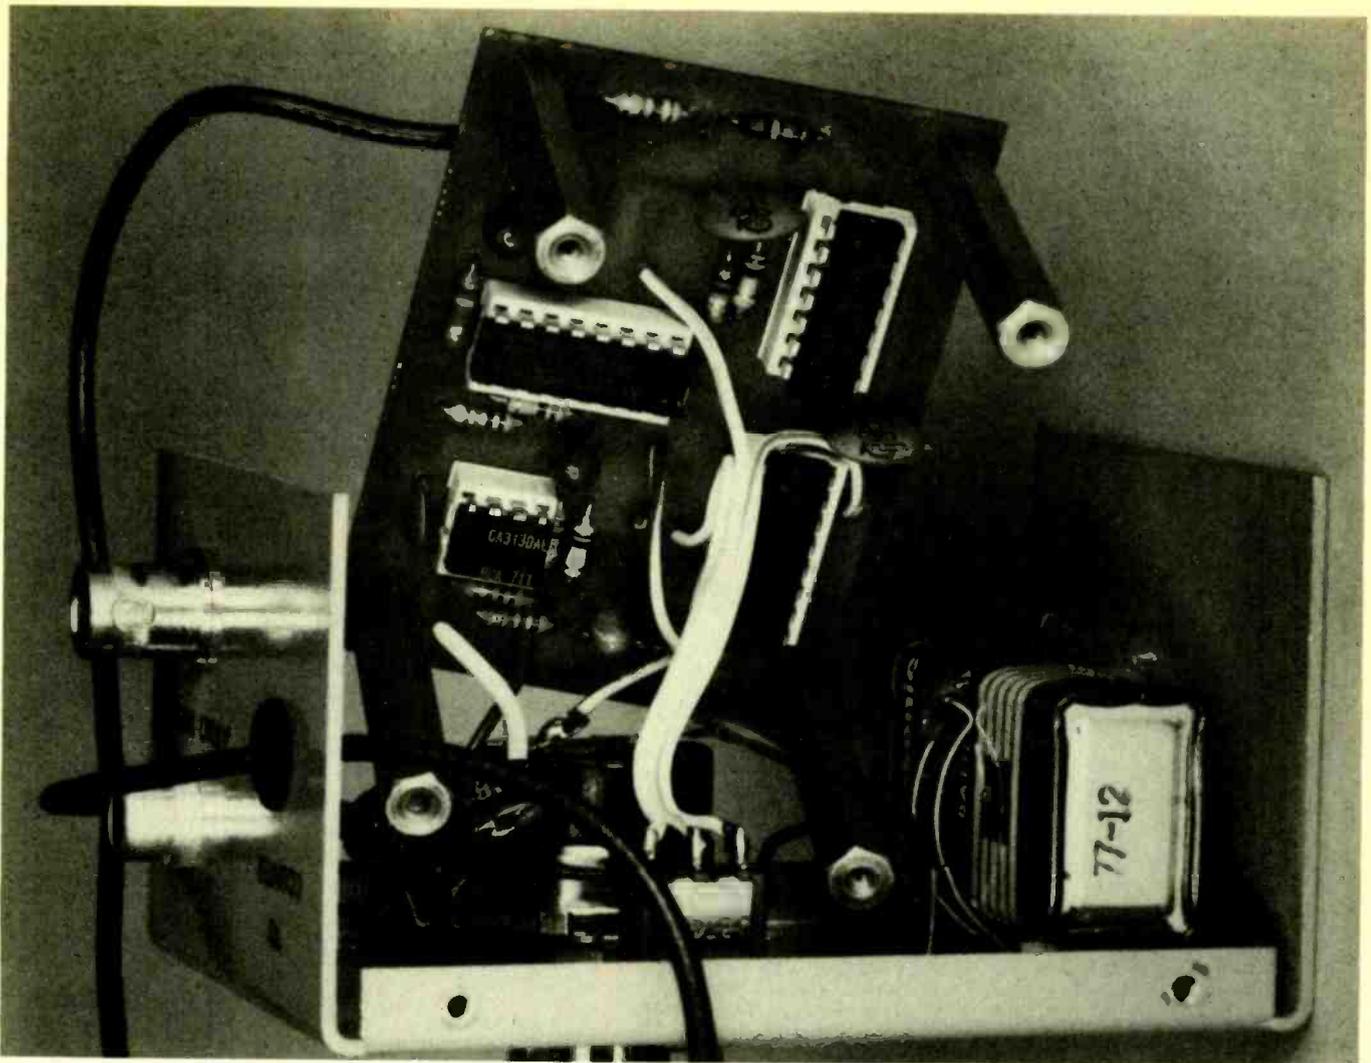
1½-INCH threaded spacers are used to attach PC board to top of case.
